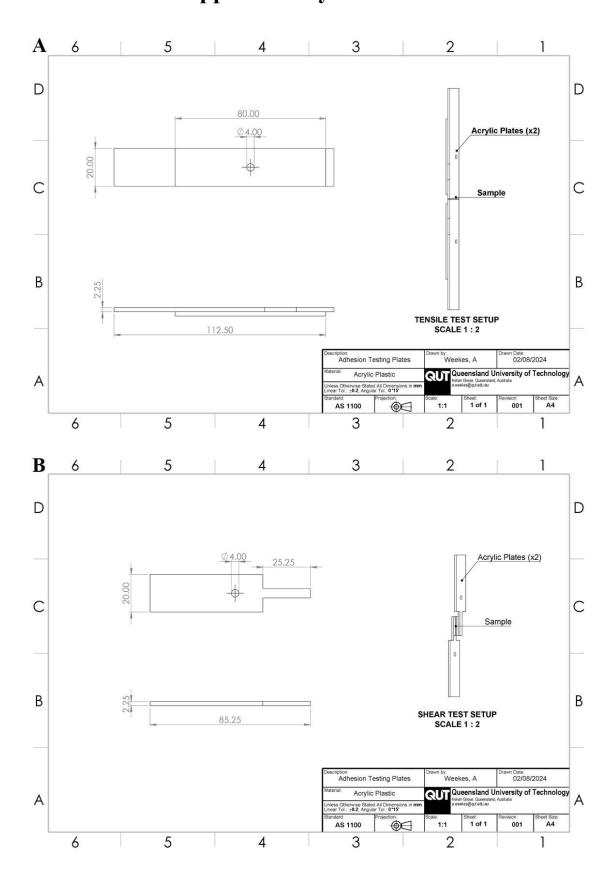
Technical drawing and dimensions for the custom-made acrylic plastic for tensile (A) and lap shear (B) test on caprine skin.
